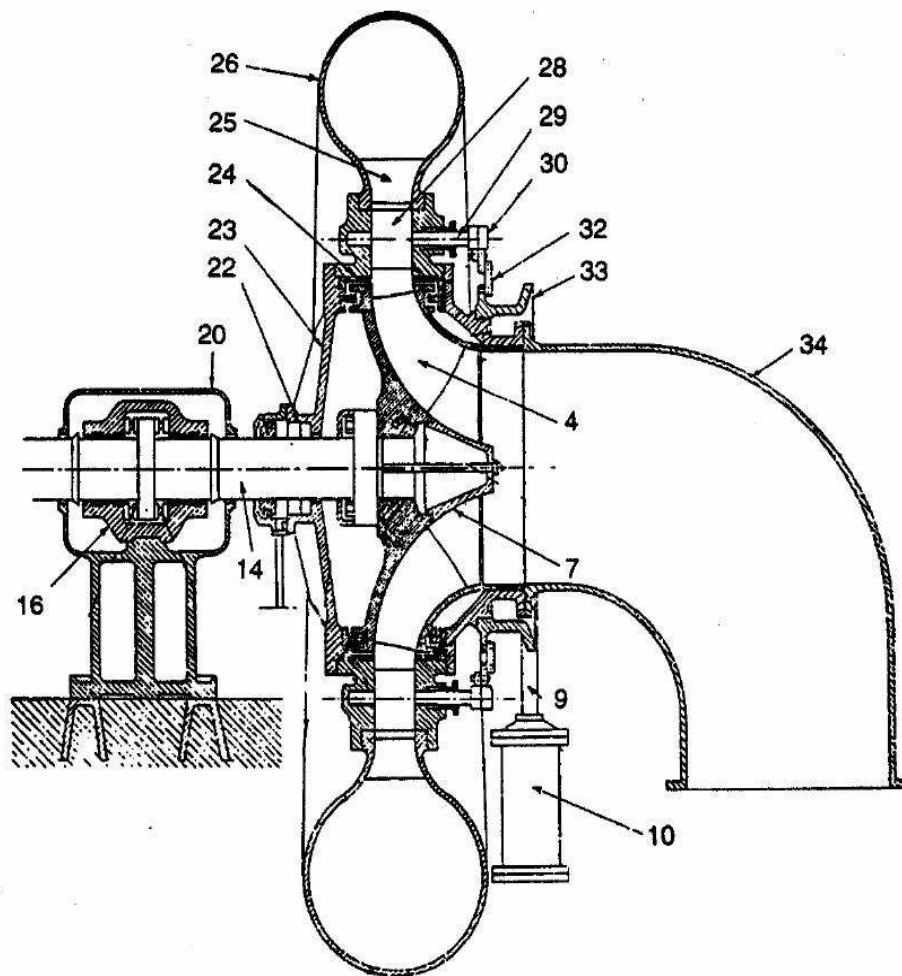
10: Horizontal Francis Turbine; 4.Runner, 7.The runner cone, 9.Servomotor rod, 10.Servomotor, 14.Turbine shaft, 16.Bearing pad, 20.Bearing cover, 22.Shaft sealing box, 23.Turbine cover, 24.Runner seal ring, 25.Stay vane, 26.Scroll case, 28.Guide vane, 29.Guide vane stem, 30.Guide vane lever, 32.Link, 33.Regulating ring, 34.Draft tube [7].
